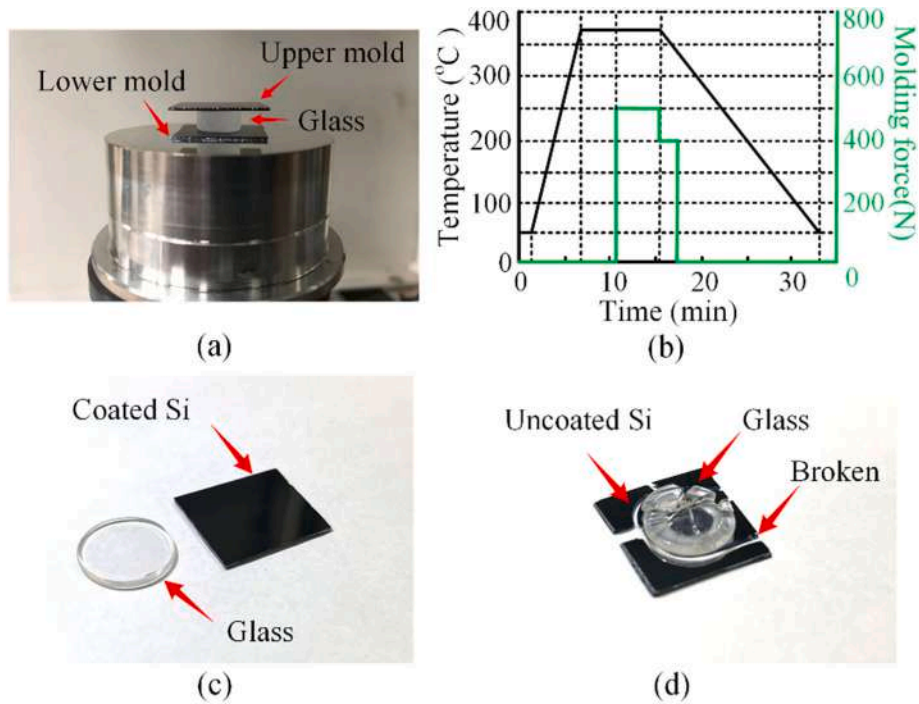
(a) Cross-section view of the glass molding experiment setup, (b) temperature and load history of glass molding, glass molding using (c) coated Si wafer, and uncoated Si wafer.
